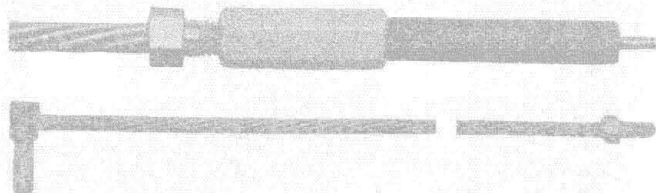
Stranded Single-Conductor Boot-Leg with Welded Terminals
